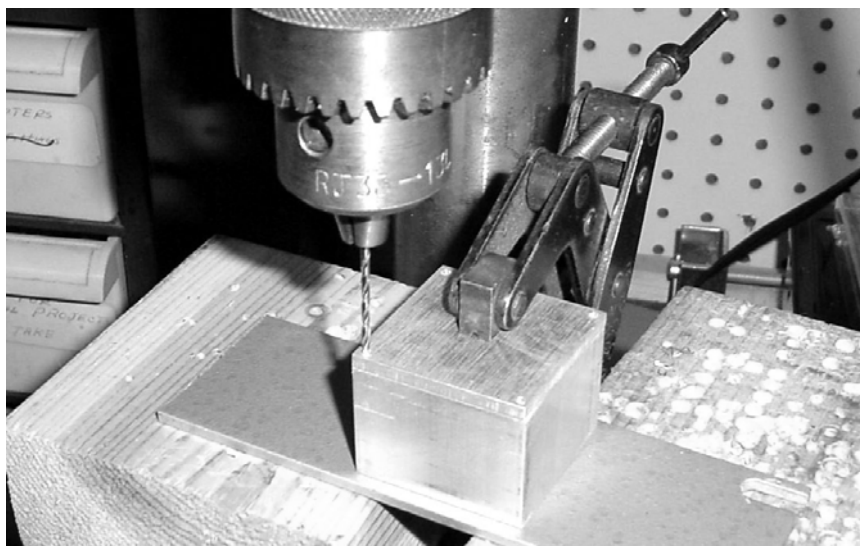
Photo C: A Section End Face Being Drilled with a Drill Guide Plate Clamped in Place
